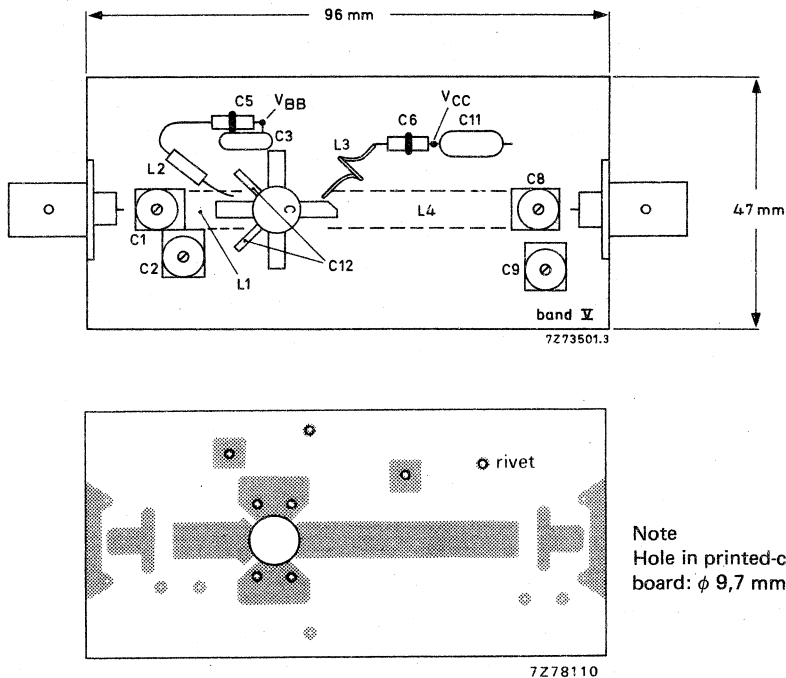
Component layout and printed-circuit board for 860 MHz class-A test circuit.
